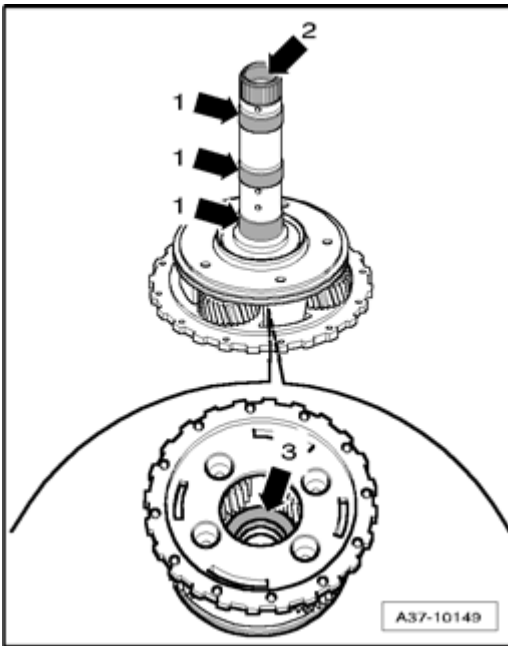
Contact Surfaces Of Brass Sleeve And Of Shaft
